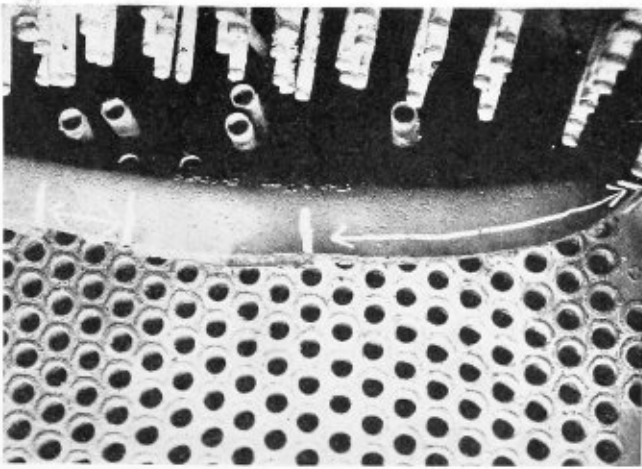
In this case the crown sheet, parts of the side sheets and door sheet pulled away from the stays
